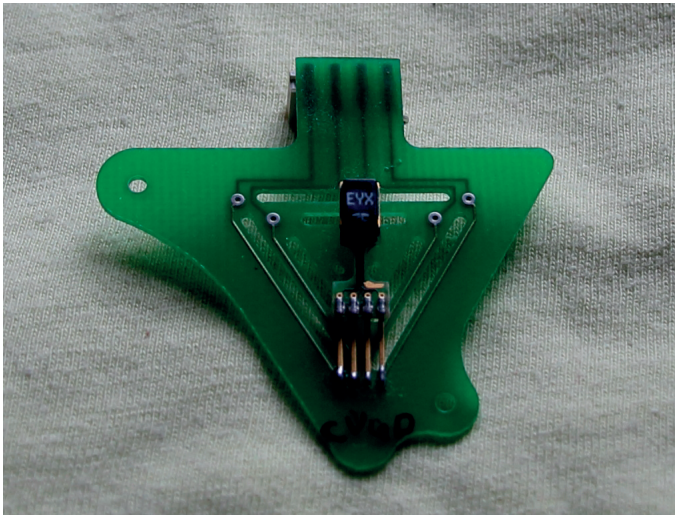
A close up of the PCB which mechanically holds the filters in place while allowing gas to pass through the preconditioning unit and contains a temperature and humidity sensor.
